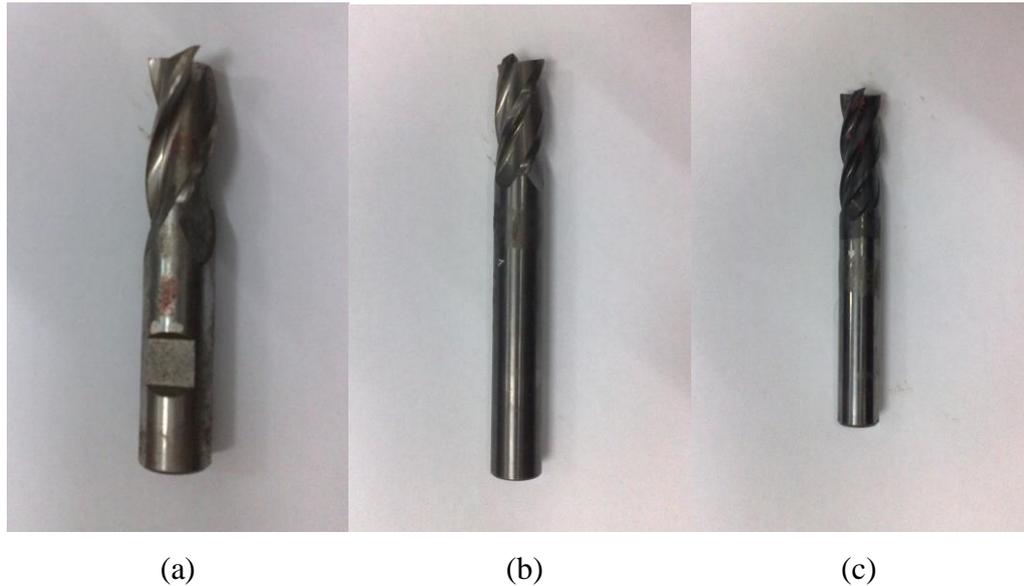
(a) 3flute End Mill, (b) 4flute End Mill, (c) 4flute Variable Helix End Mill
